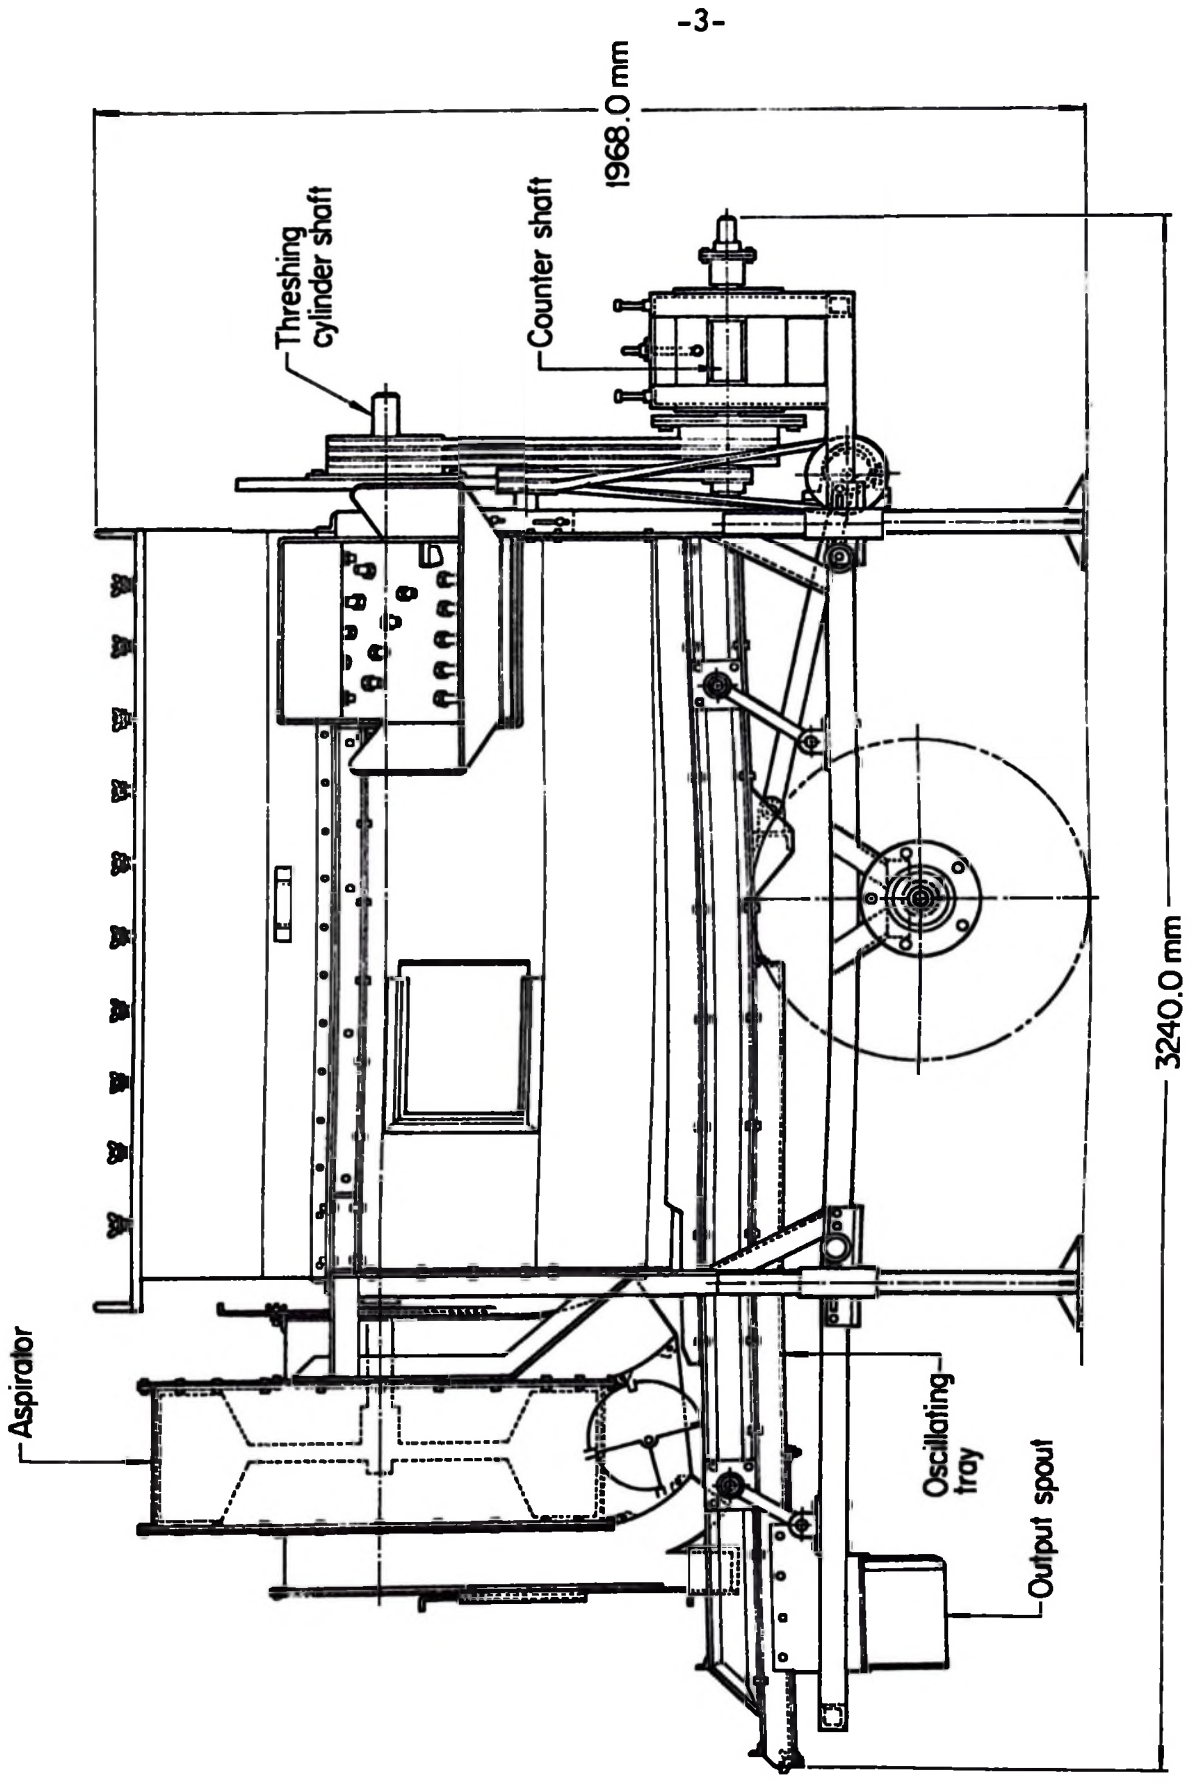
Side view of the modified IRRI-PAK multicrop thresher.
